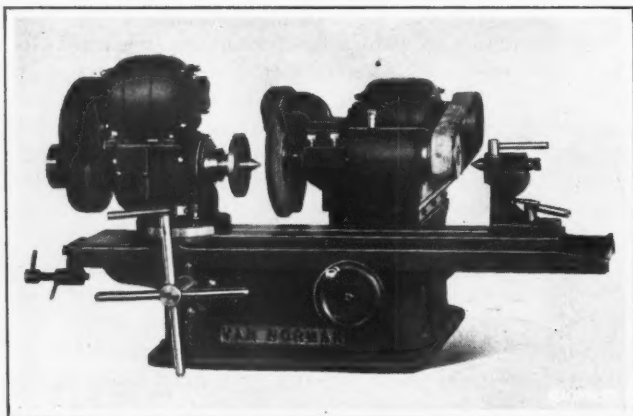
"Relio" Bench Grinding Machine developed by the Van Norman Machine Tool Co.
